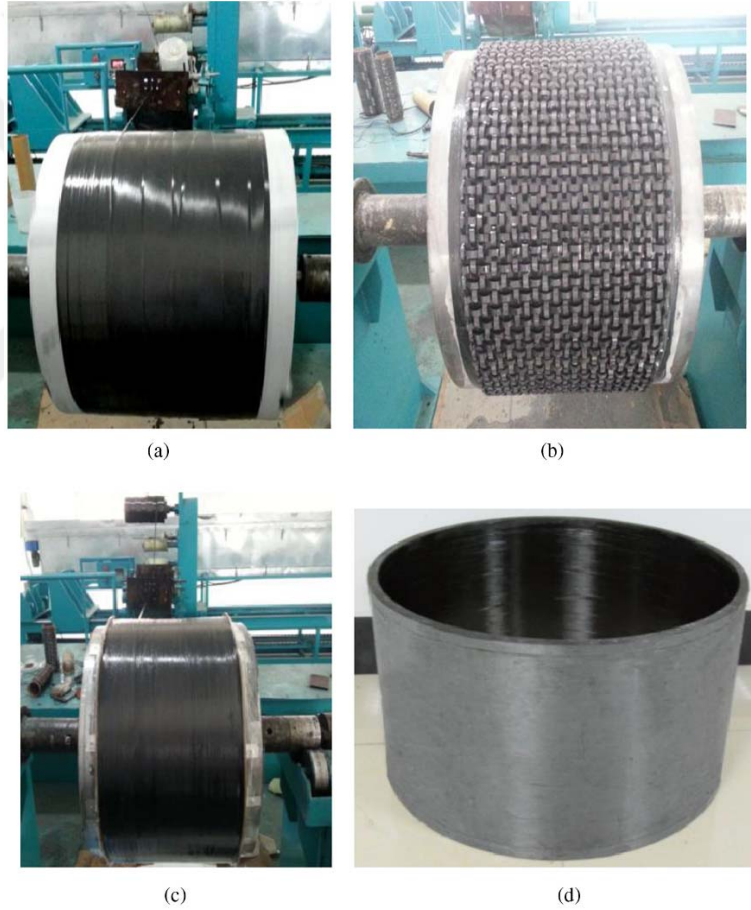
Sandwich cylinder produced by filament winding method: (a) winding inner face sheet; (b) placing core material; (c) winding outer face sheet; (d) finished product (Li et al., 2016)
